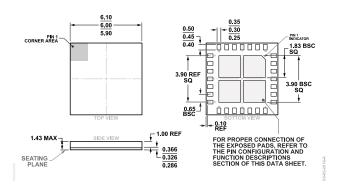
28-Terminal Land Grid Array [LGA] (CC-28-3) Dimensions shown in millimeters
